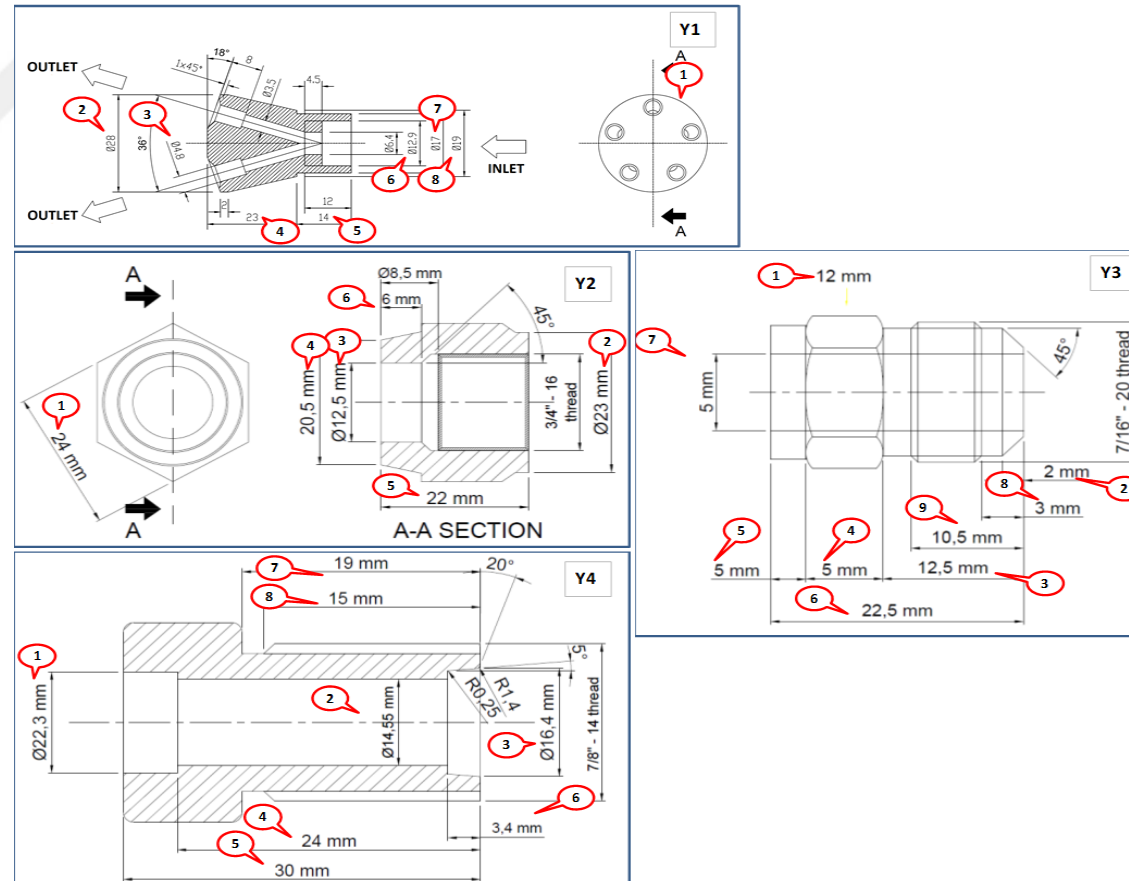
Semi-finished technical drawing – numbered and technical drawing – numbered
